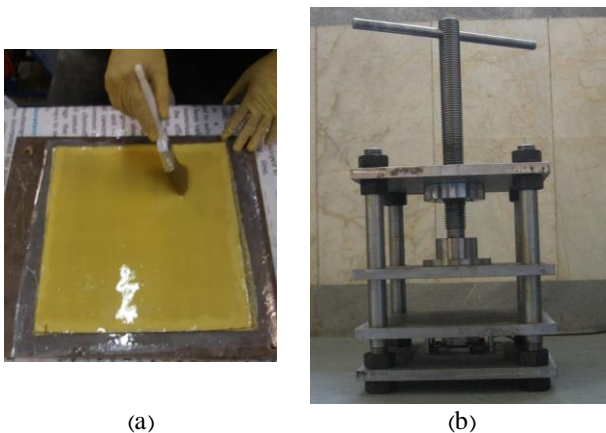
Manufacturing Kevlar/Epoxy composite (a) Hand layup (b) Press tool
